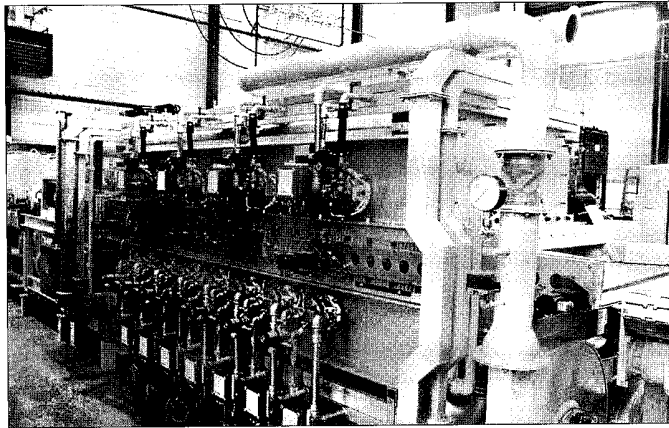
Carbon potential controlled roller-hearth furnace with gas quenching system for the hardening of bearing rings
